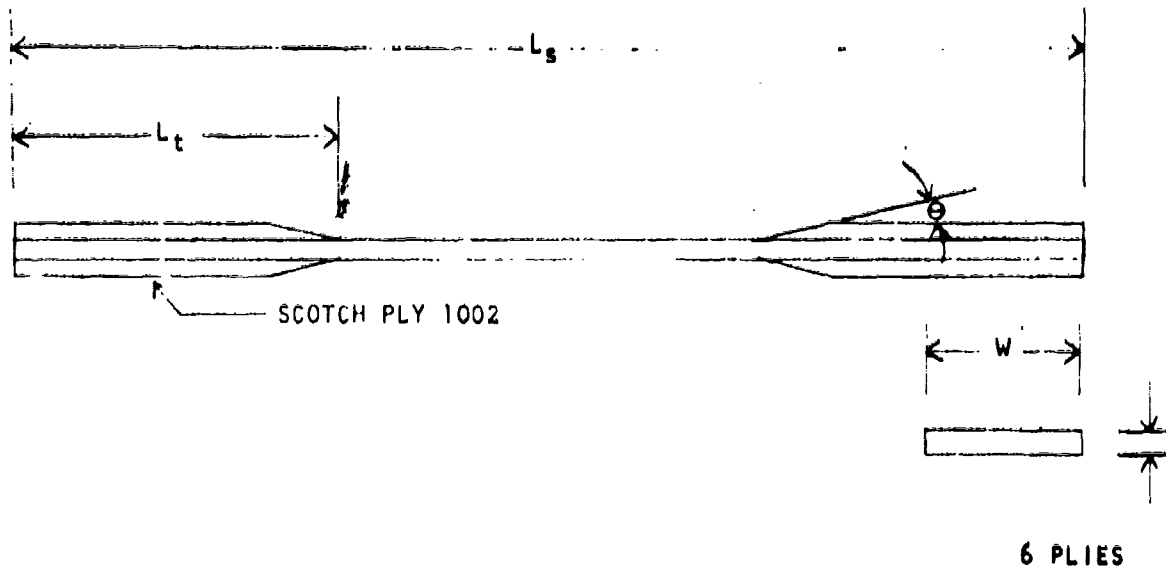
Longitudinal Flexure Specimen (0°), Configurations and Loading Diagram
